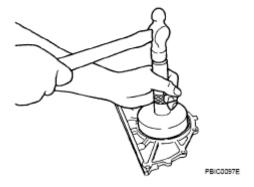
Fitting Rear Oil Seal Courtesy of NISSAN MOTOR CO., U.S.A.
